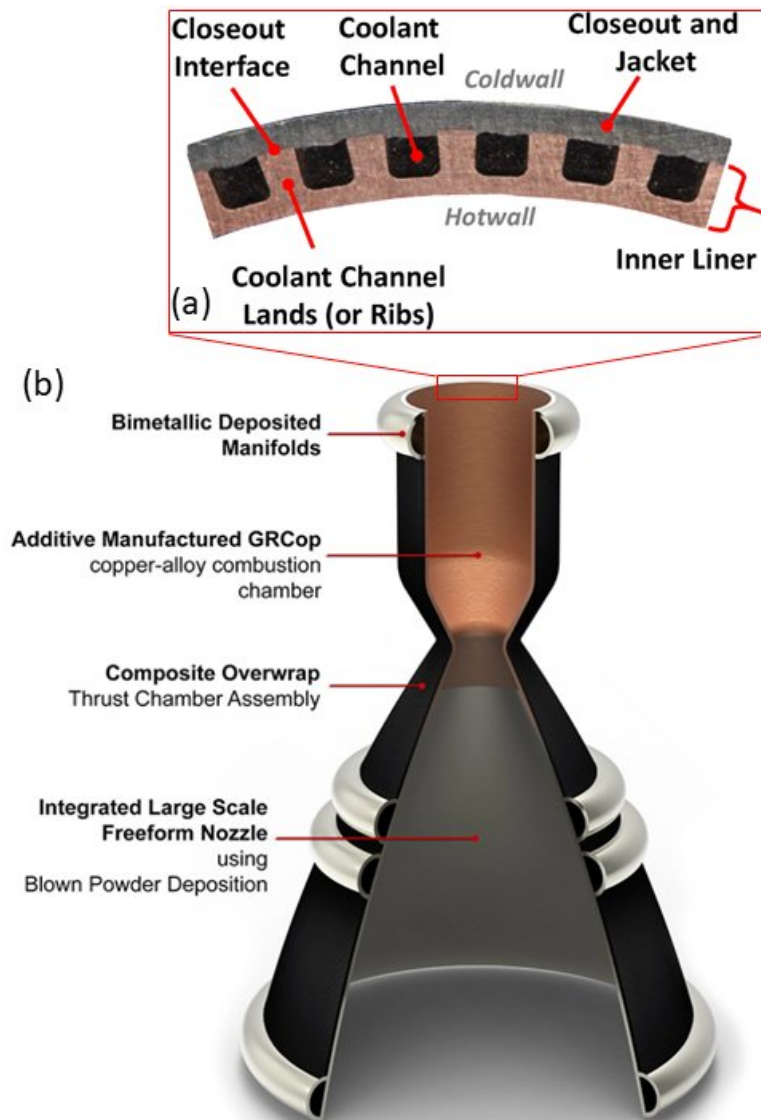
Part (a) shows a magnified view of the cooling channels [1] inside of a (b) regeneratively cooled combustion chamber [9].
